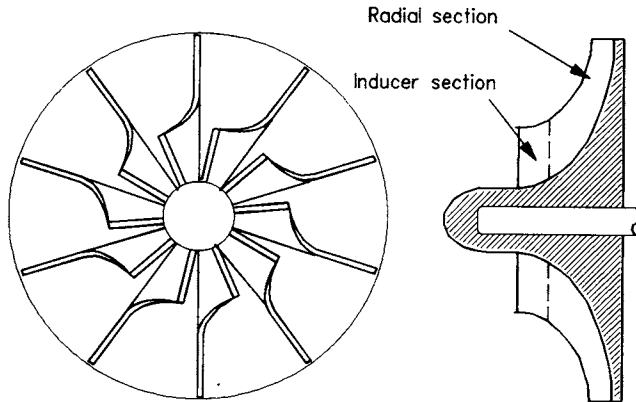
Centrifugal compressor rotor showing inducer and radial sections
